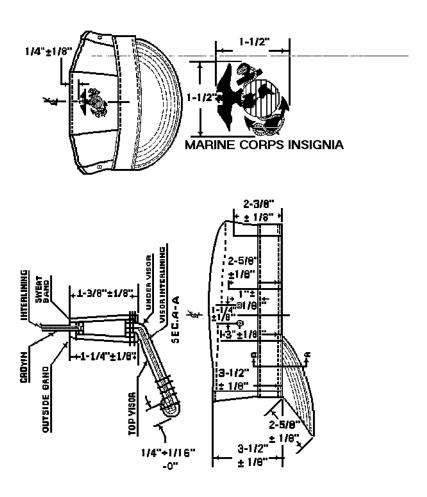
CAP, UTILITY, CAMOUFLAGE
